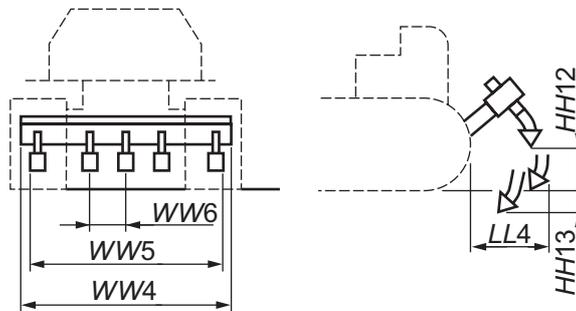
Dimensions of equipment and scarifier installed on loaders
